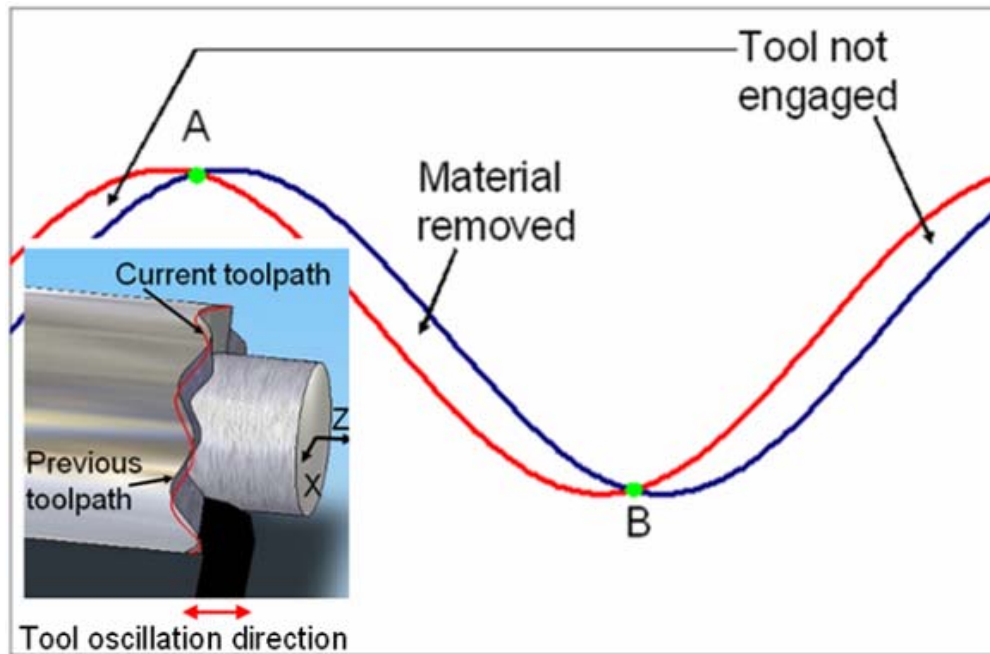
Exaggerated view of a cylindrical workpiece showing a wavy cut face surface created by an oscillating tool-path.
